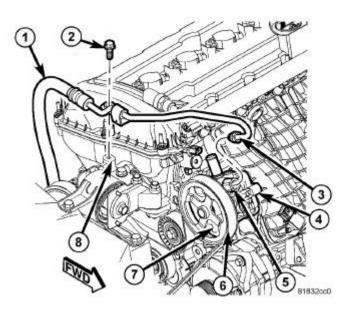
Power Steering Pump Bolts & Pulley Courtesy of CHRYSLER GROUP, LLC
